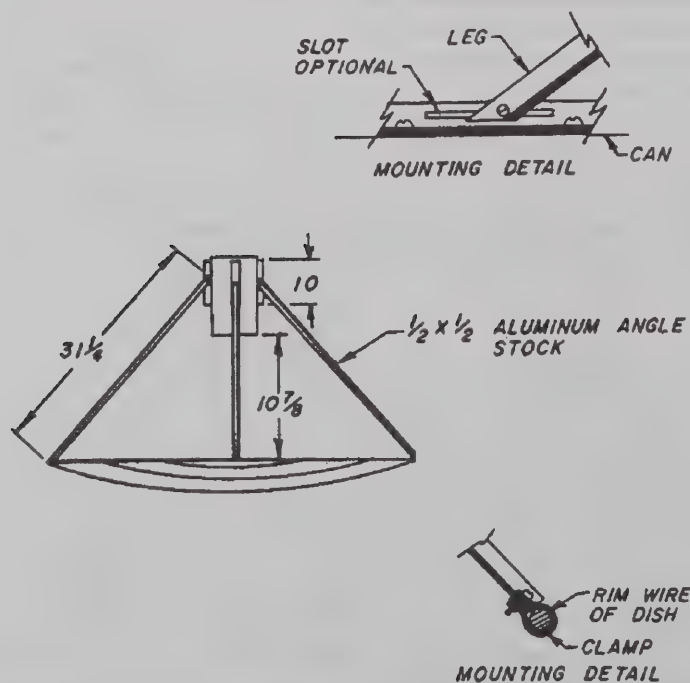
Tripod mounting leg dimensions. Dimensions are given in inches.
